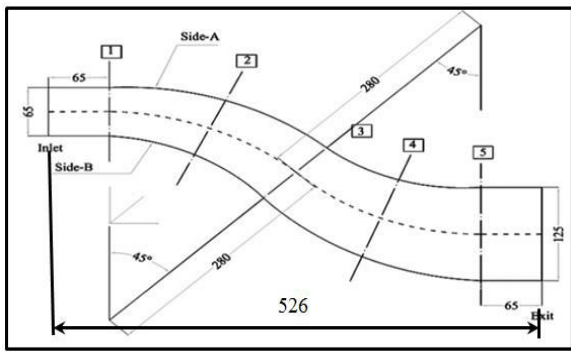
Geometry of S-shaped diffuser (dimensions in mm).
